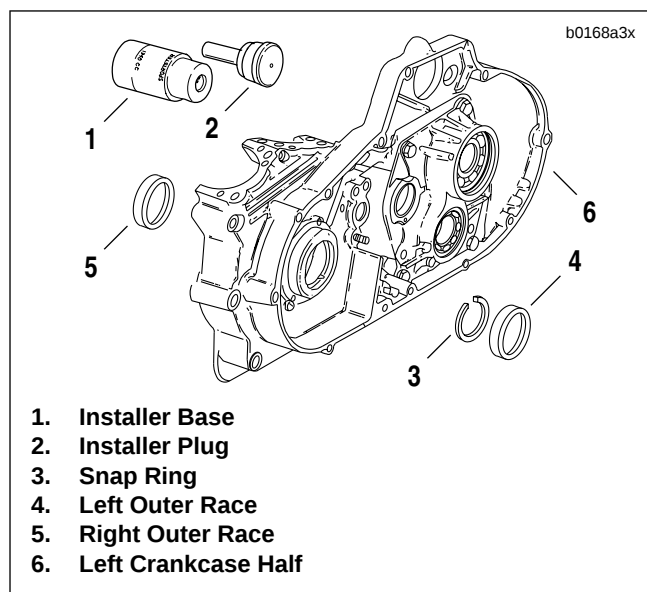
Installing Sprocket Shaft Bear Outer Races
